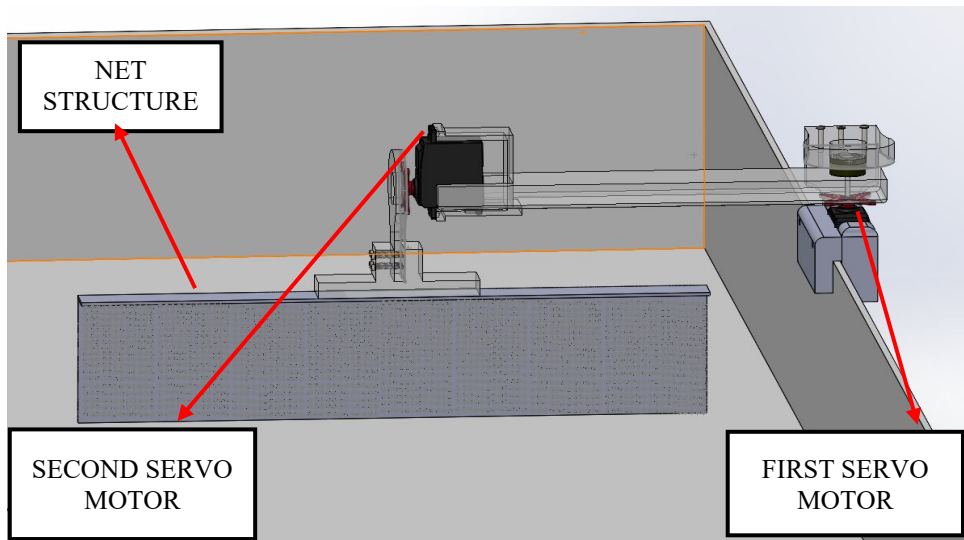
Isometric view of the tank and automated arm designed using SolidWorks
